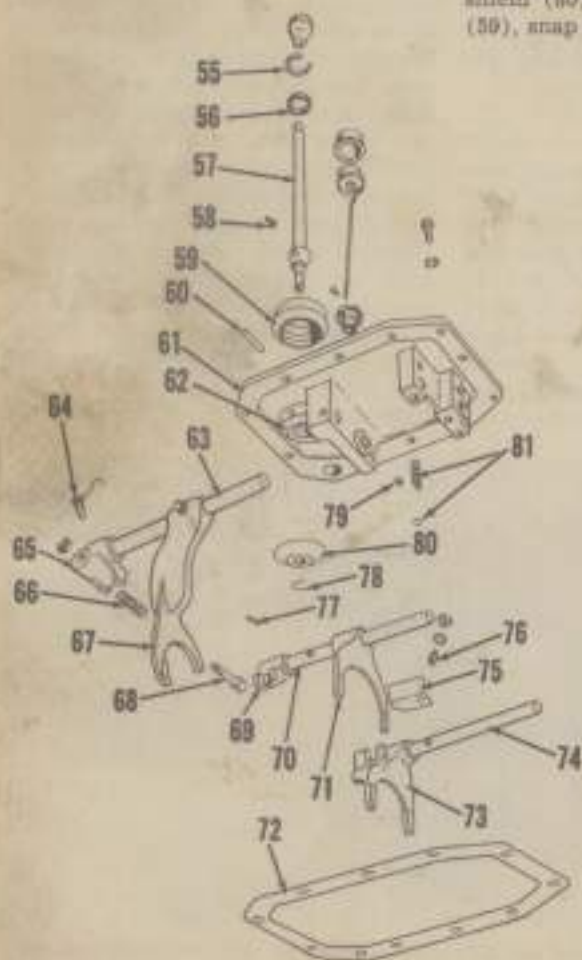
Exploded view of the Allis-Chalmers D-17 transmission shifter assembly.
